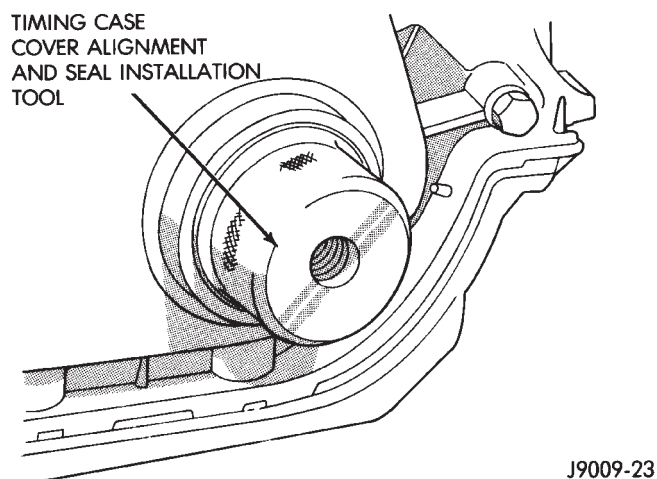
Timing Case Cover Alignment and Seal Installation Tool 6139 (J-22248)
